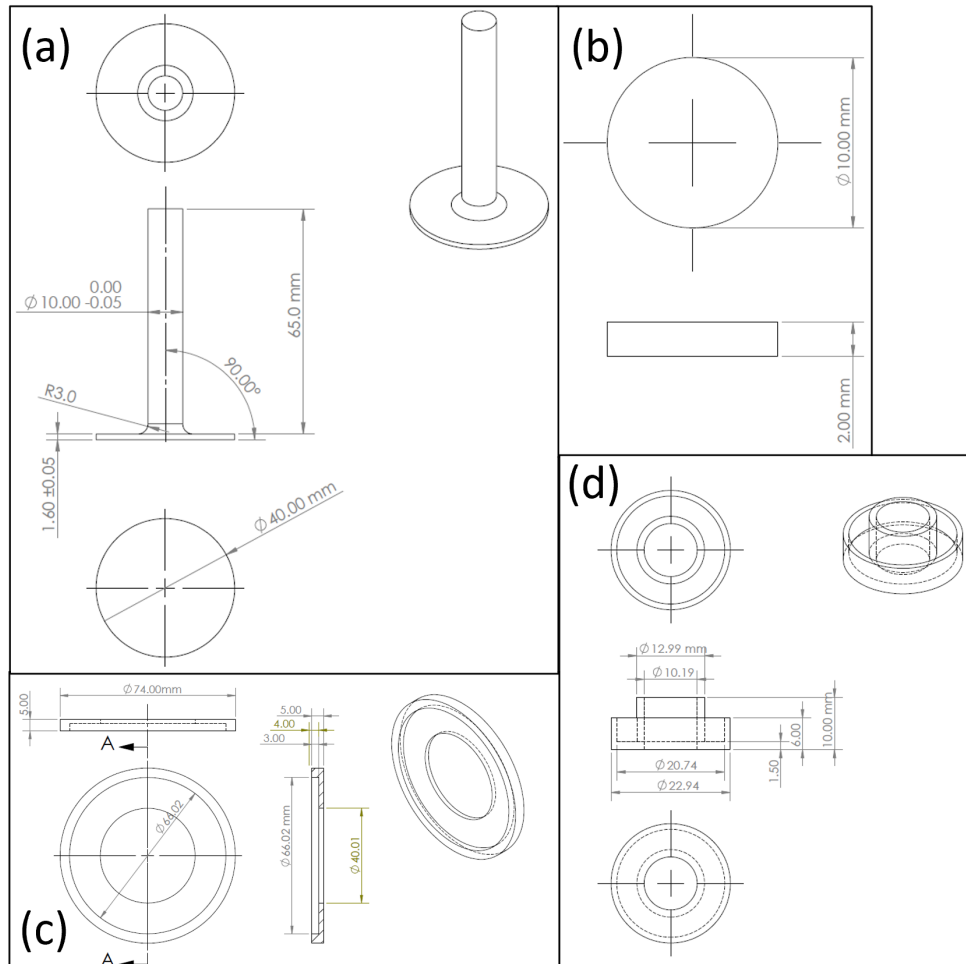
Part layout for the machined and 3D printed parts of the Rheo-Impedance setup. a) stainless steel upper geometry, b) stainless steel lower plate, c) 3D printed center guide used to install lower plate on the Peek geometry, and d) solvent trap installed on the upper geometry to be filled with liquid metal
